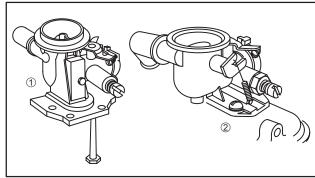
TYPES OF VACU-JET CARBURETORS
